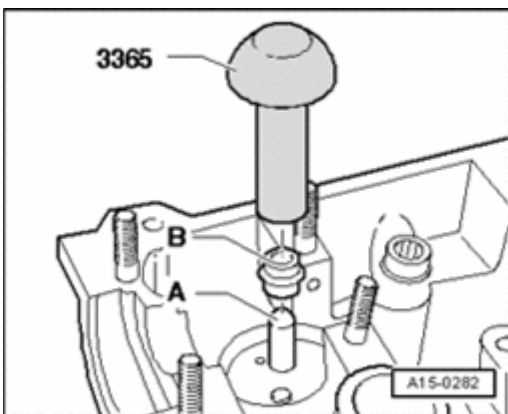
Identifying Plastic Sleeve, Valve Stem Oil Seal & Valve Stem Seal Driver 3365
